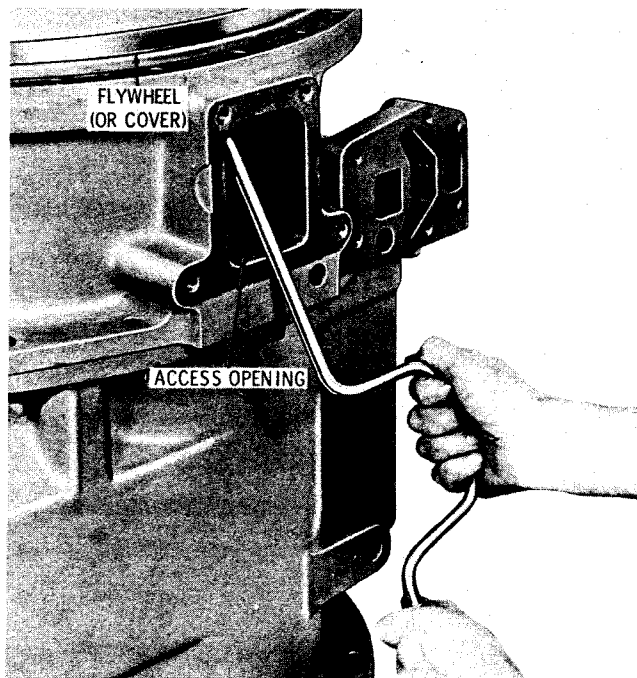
Removing bolts which retain flywheel (or converter drive cover)
